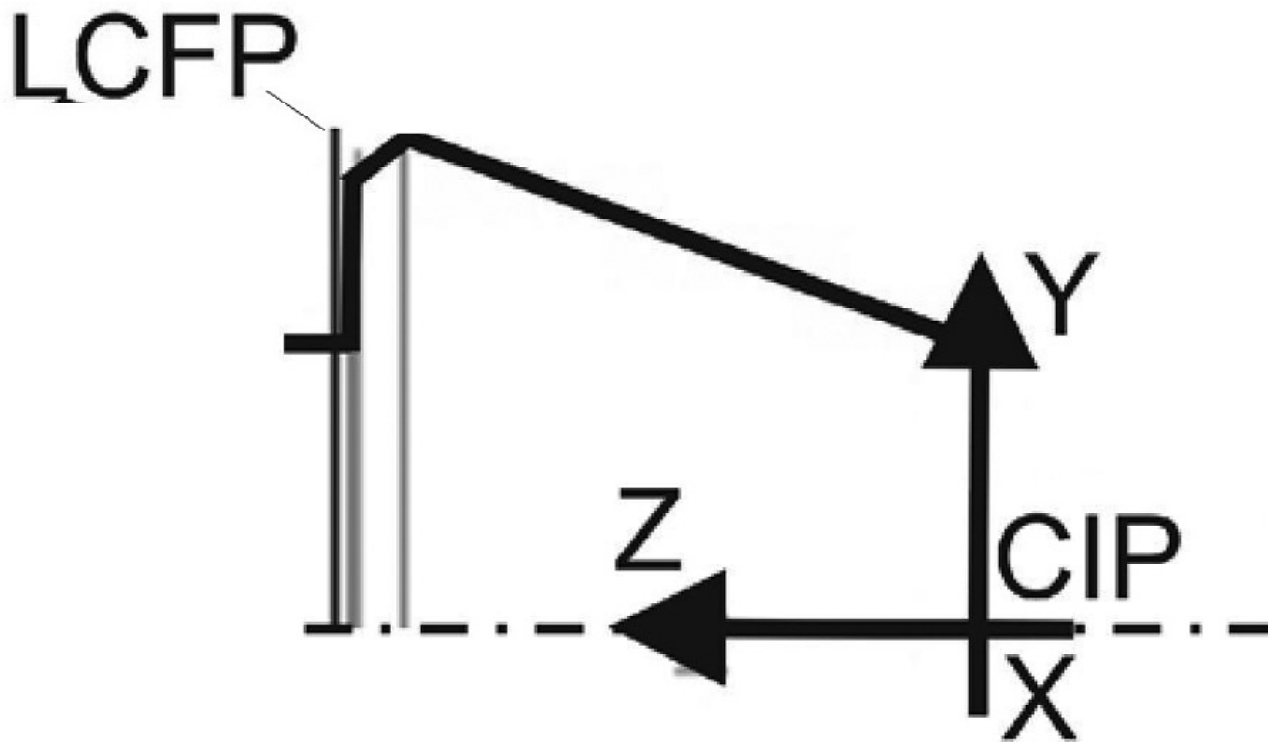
Tapered countersinking tool — Sketch of cutting part
